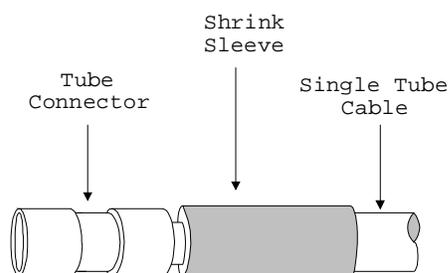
D1-1. Installed single tube BOF cable sleeve.
